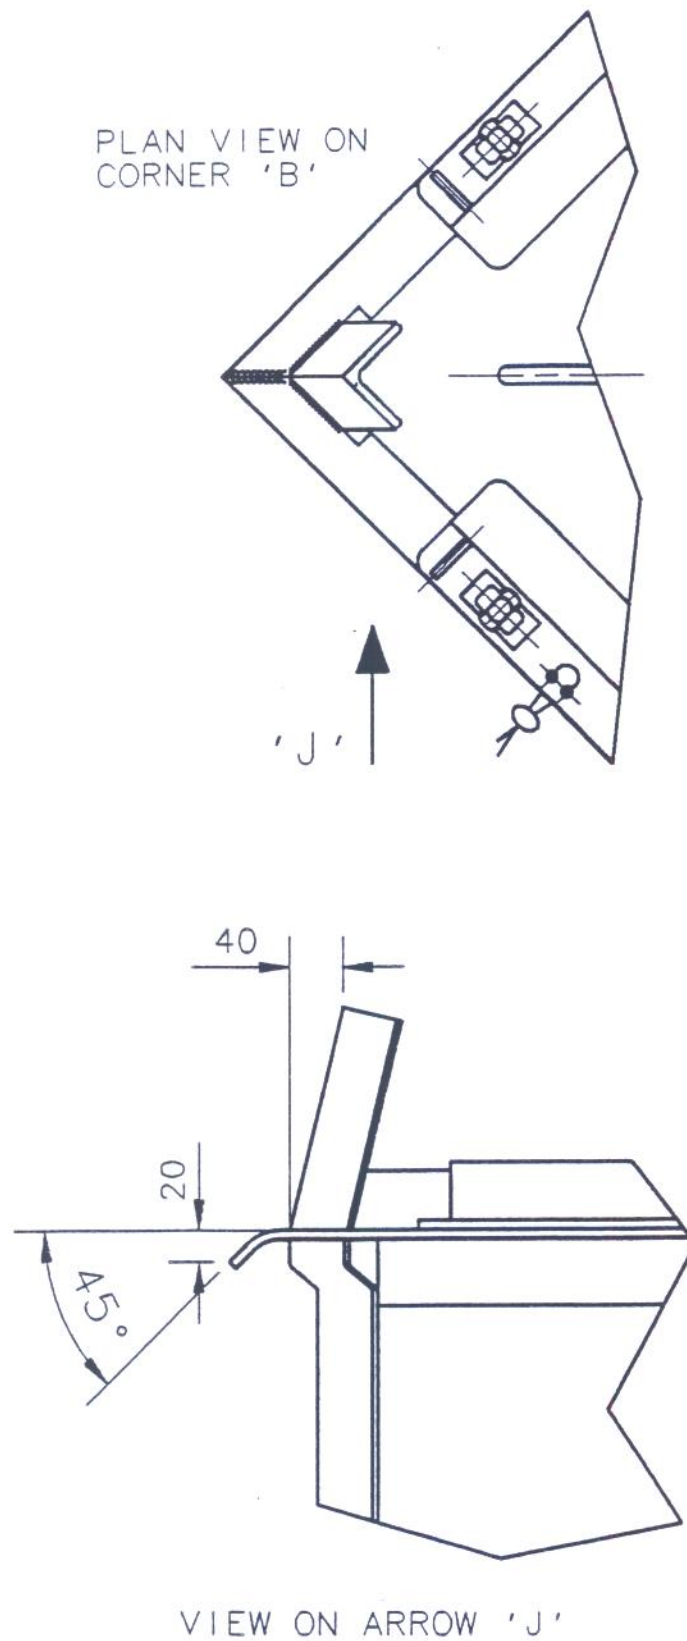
Damage to Corner B after 0.3m Corner Drop
